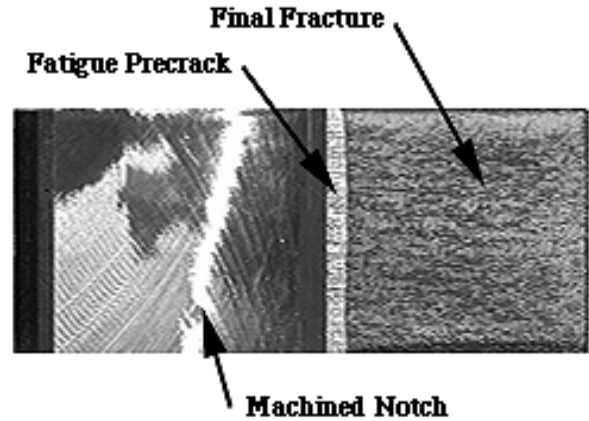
, Fracture surface of a 7075-T6 Aluminum displaying flat fracture surface
